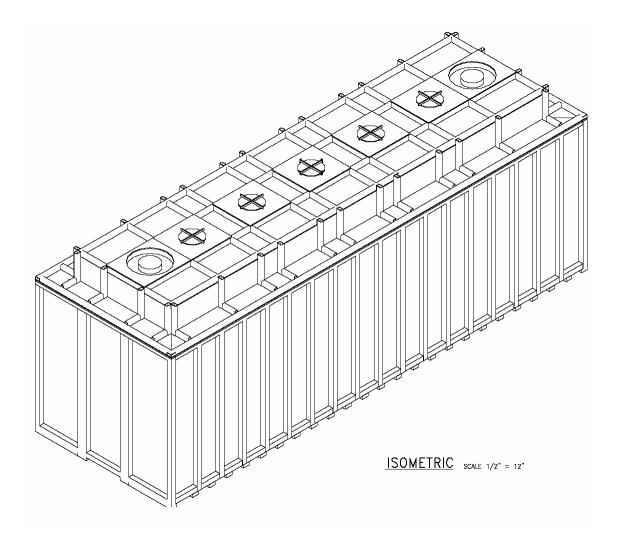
Isometric Drawing of ICVTM Box with Lid
